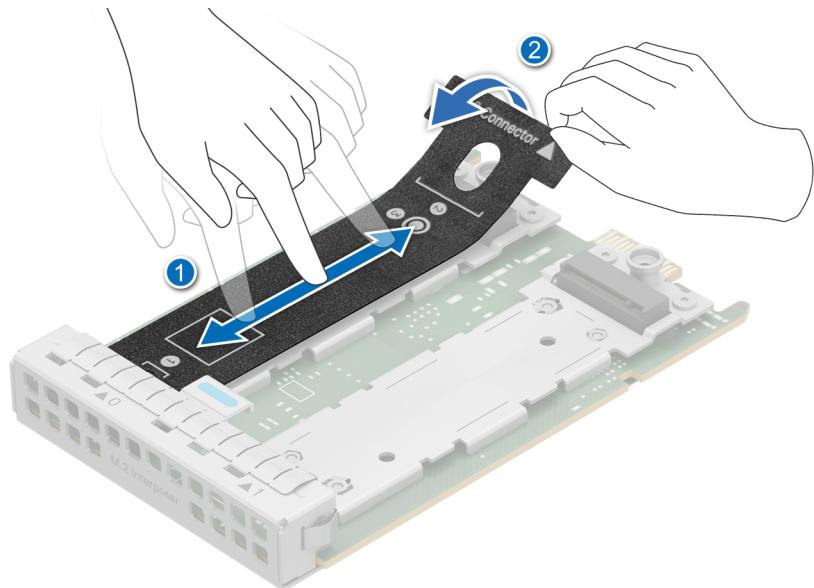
Pasting the new thermal pad on the board and removing the black mylar
